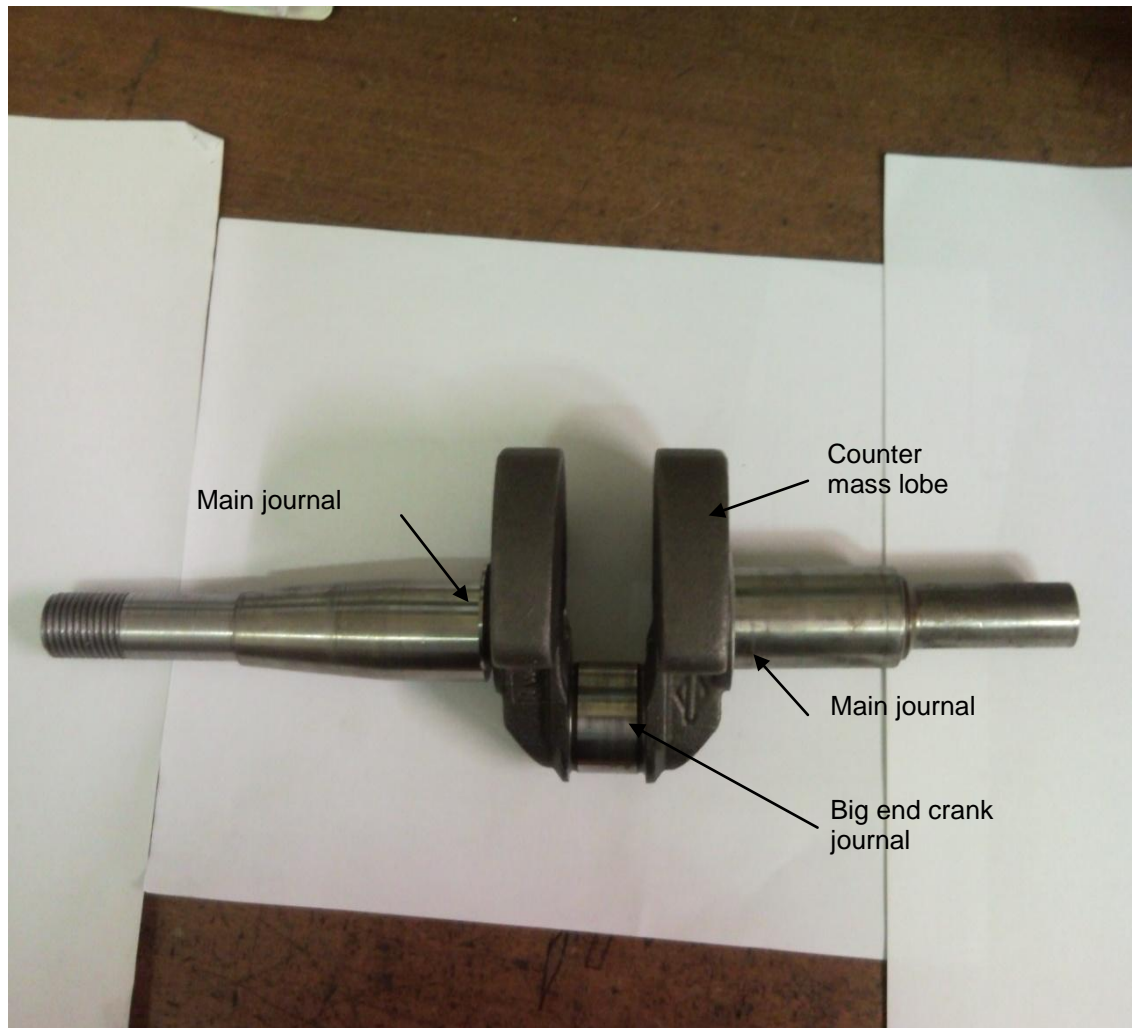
Typical Intec Briggs and Stratton internal combustion engine crankshaft
